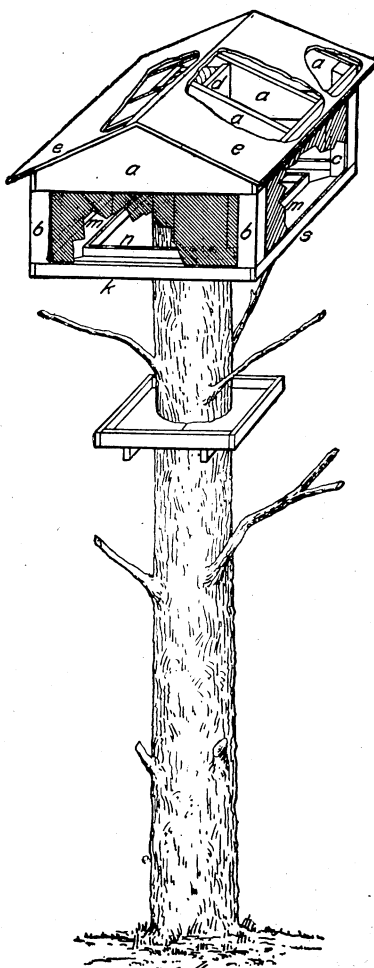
Food shelter for attachment to post. Roof cut away to show construction. Sides made of glass; size of panes 8 by 10 inches.
